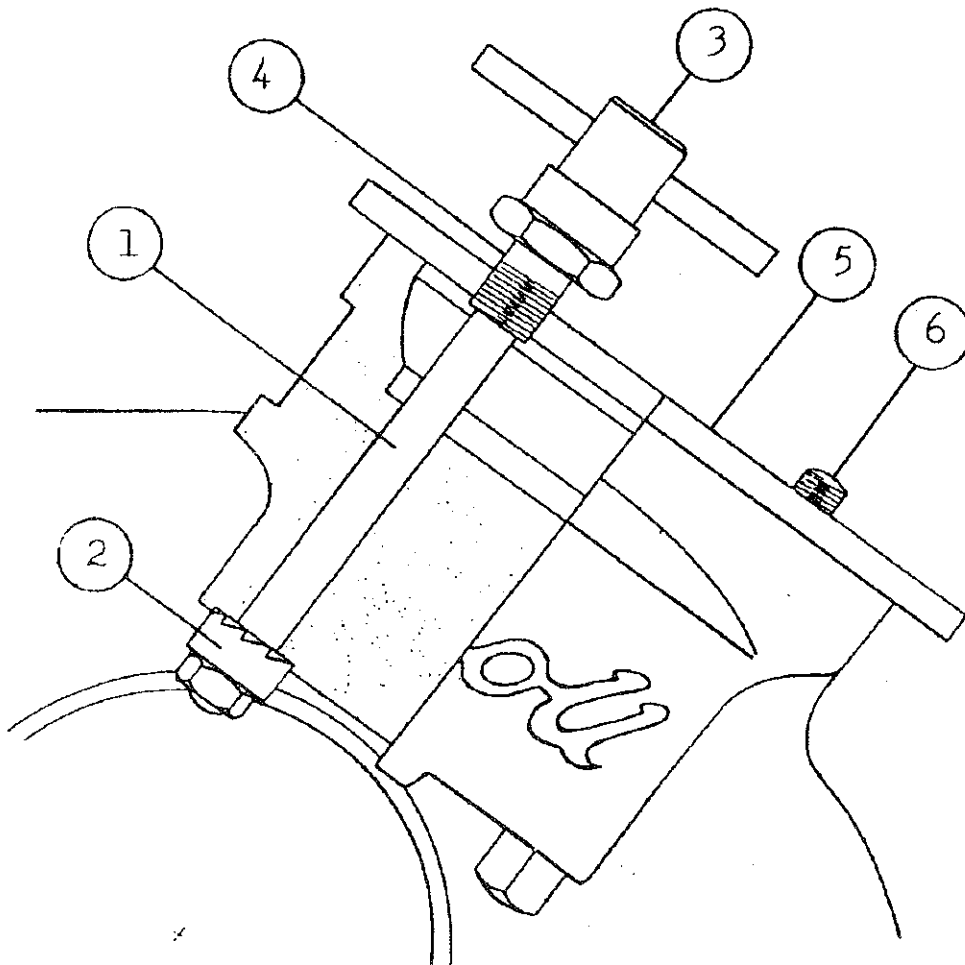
Tool for re-cutting cylinder holding-down bolt pockets.
